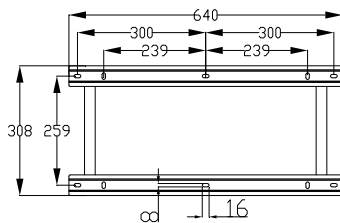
B1-5.1-4.8 wall mounting bracket dimensions (slave device)
